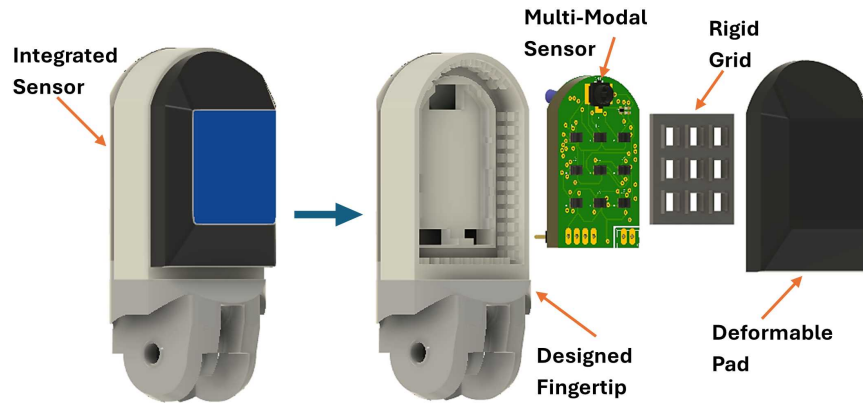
CAD of an integrated sensor (left) and exploded view with all components (right).
